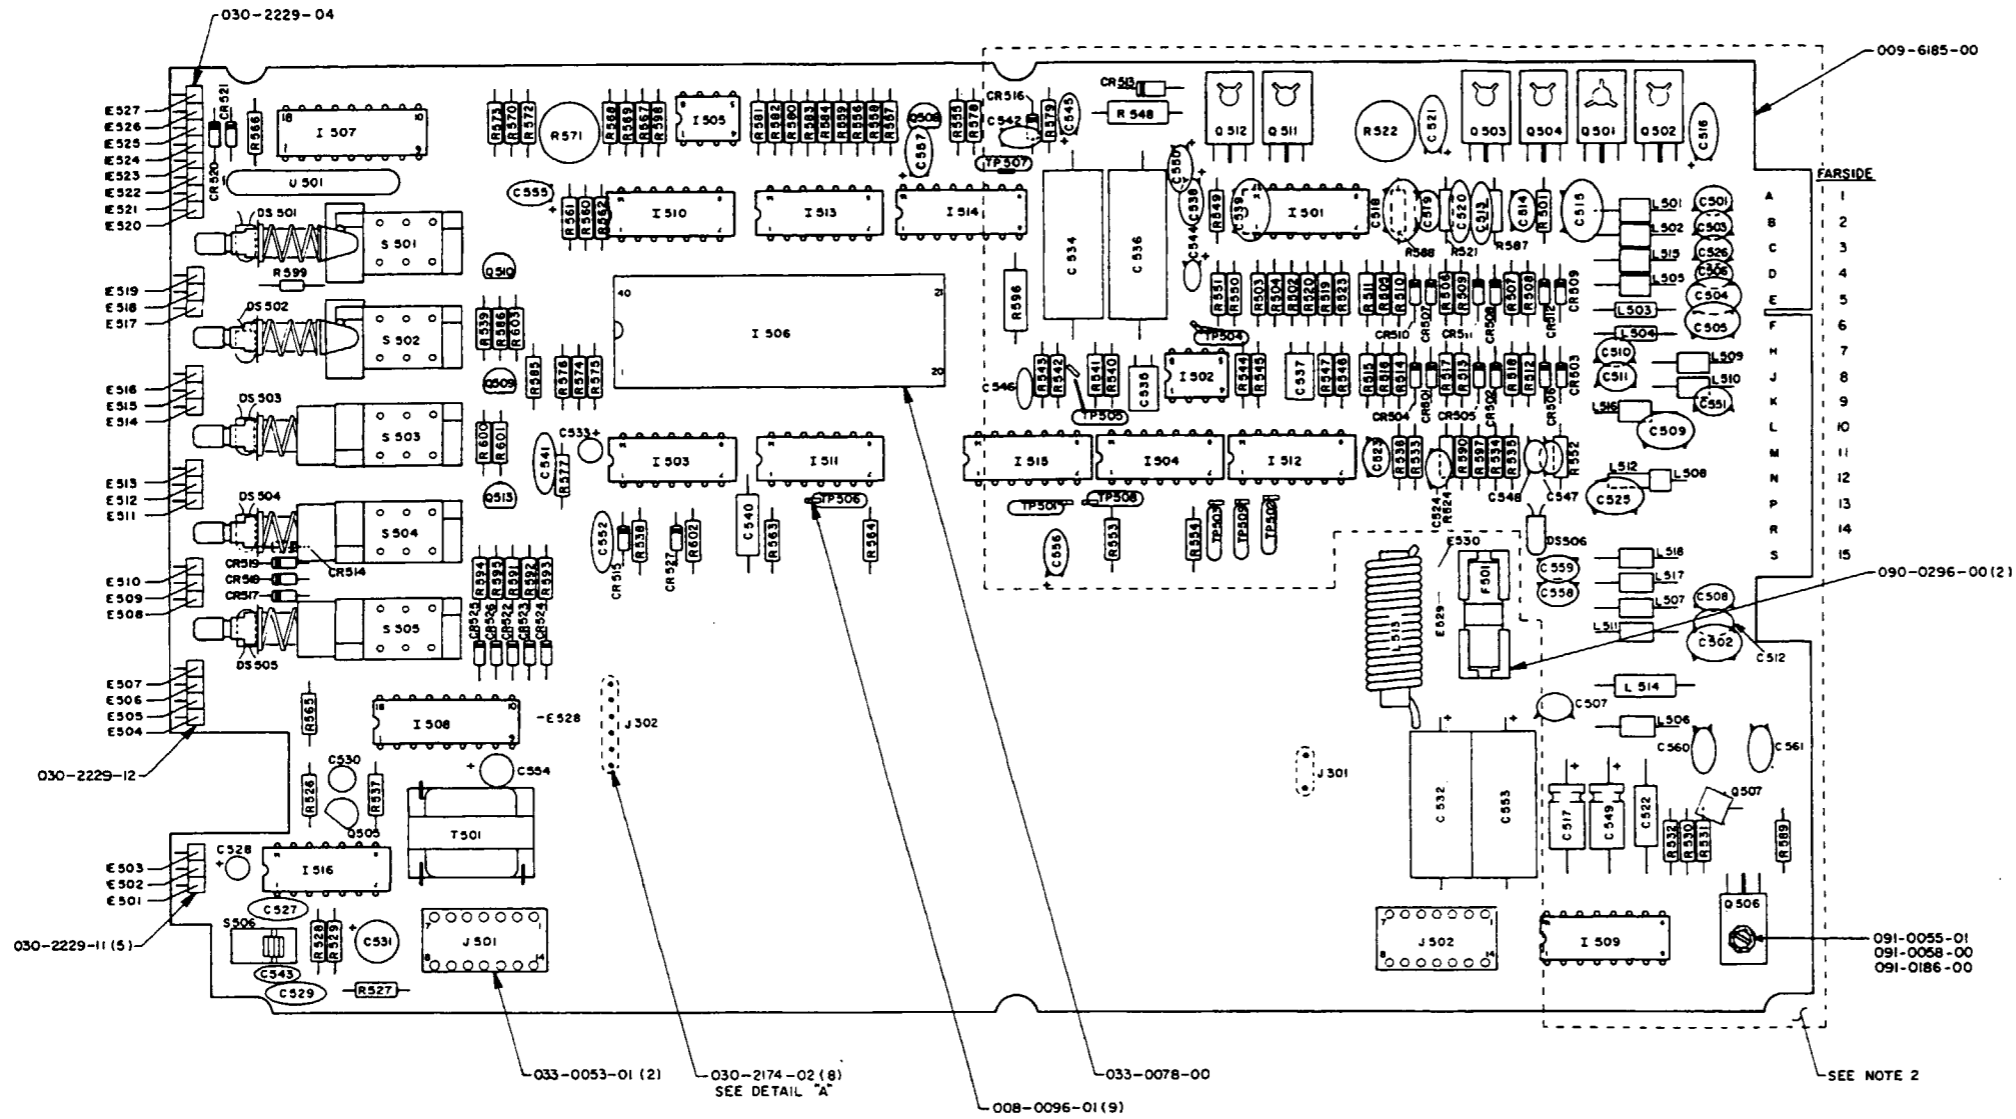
A KR 87 MAIN BOARD ASSEMBLY
